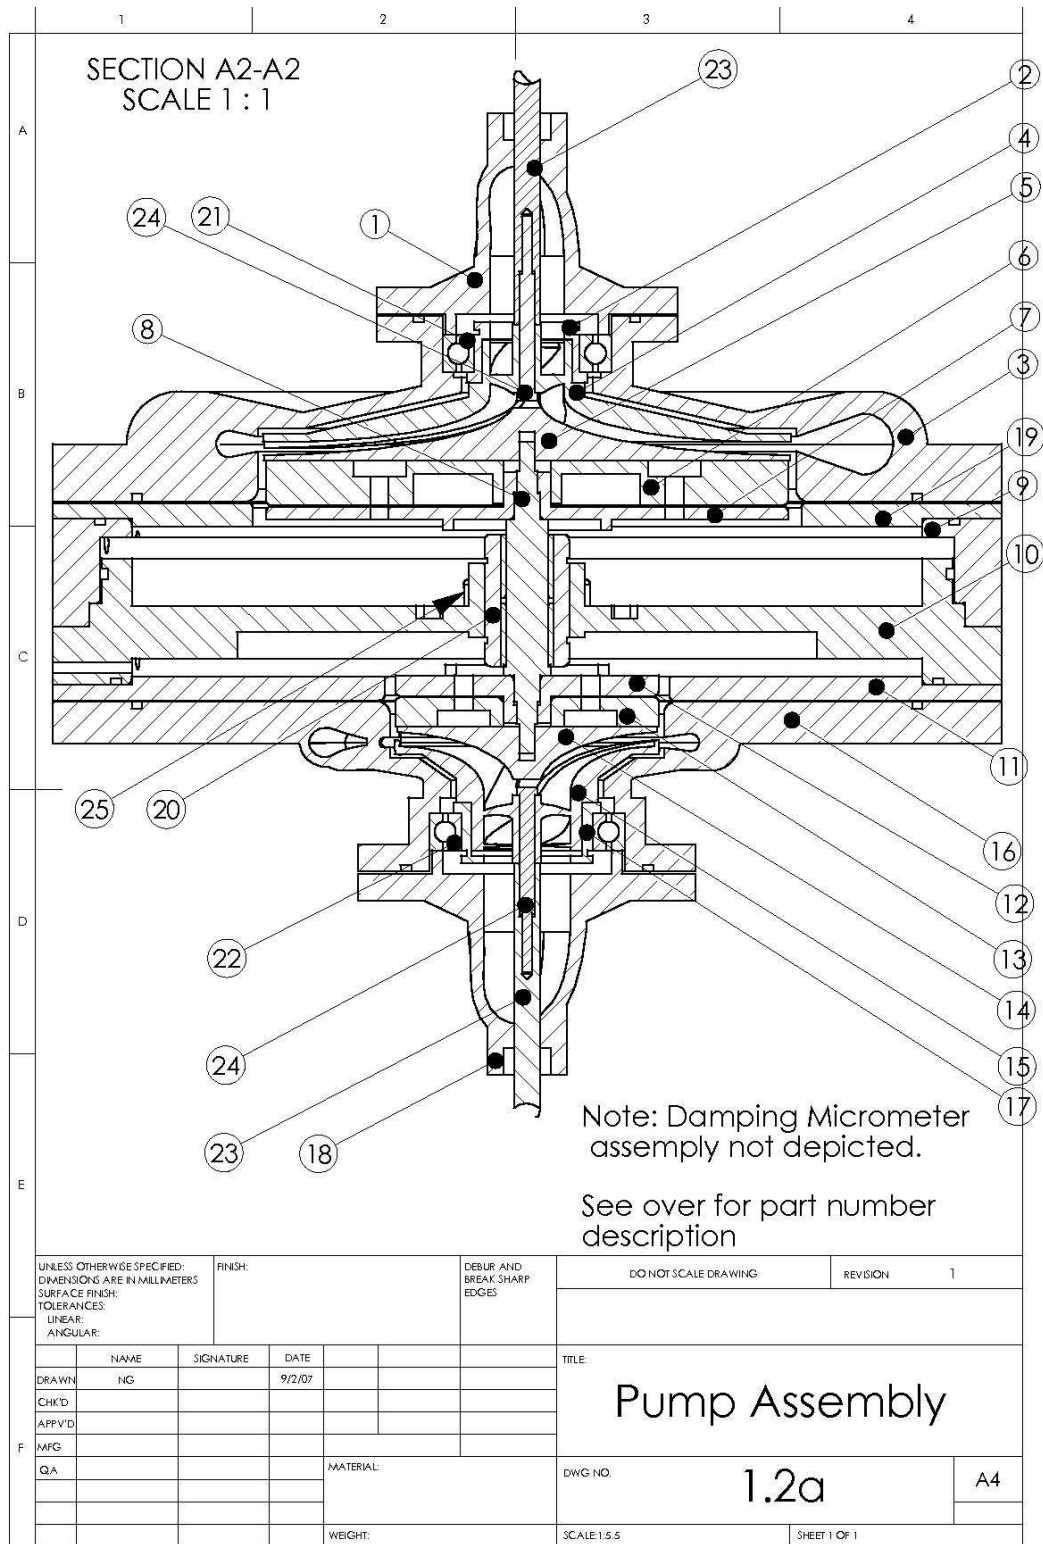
Sectioned numbered assembly drawing of the prototype.
